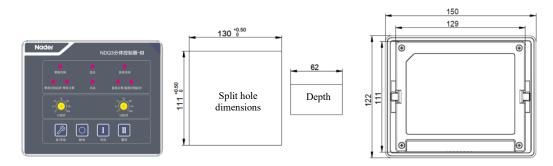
Outline and Mounting Hole Dimension Diagram of the N-type/Blank Split-type Controller
